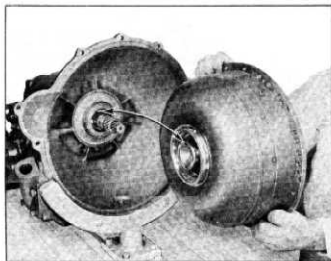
Aligning Primary Pump with Front Pump Drive Lugs
